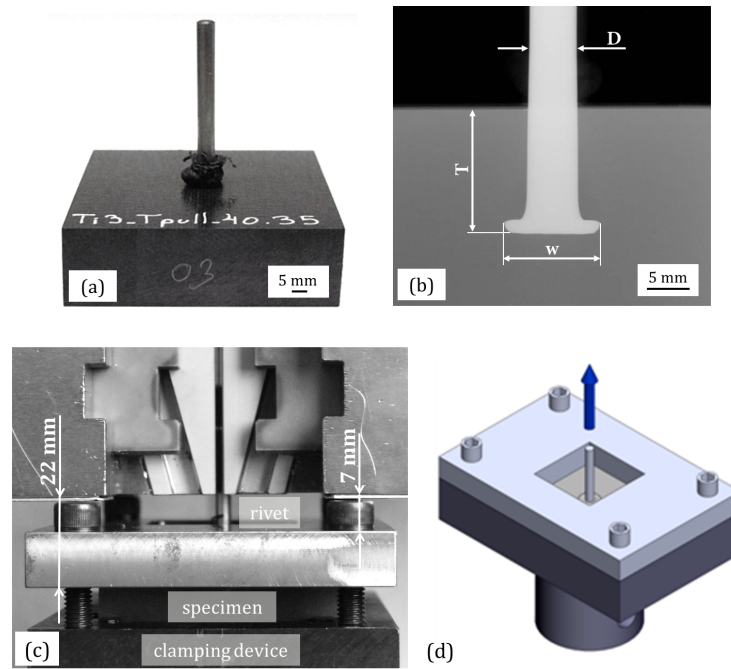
(a) Photograph of a friction-riveted metallic-insert joint. (b) X-ray image of a metallic-insert joint, indicating initial diameter of the rivet (D), penetration depth (T) and widening of rivet tip (w). Clamping device for pull-out testing. (c) Test set-up, showing active components and free clamping length. (d) Schematic 3D view of clamping device
